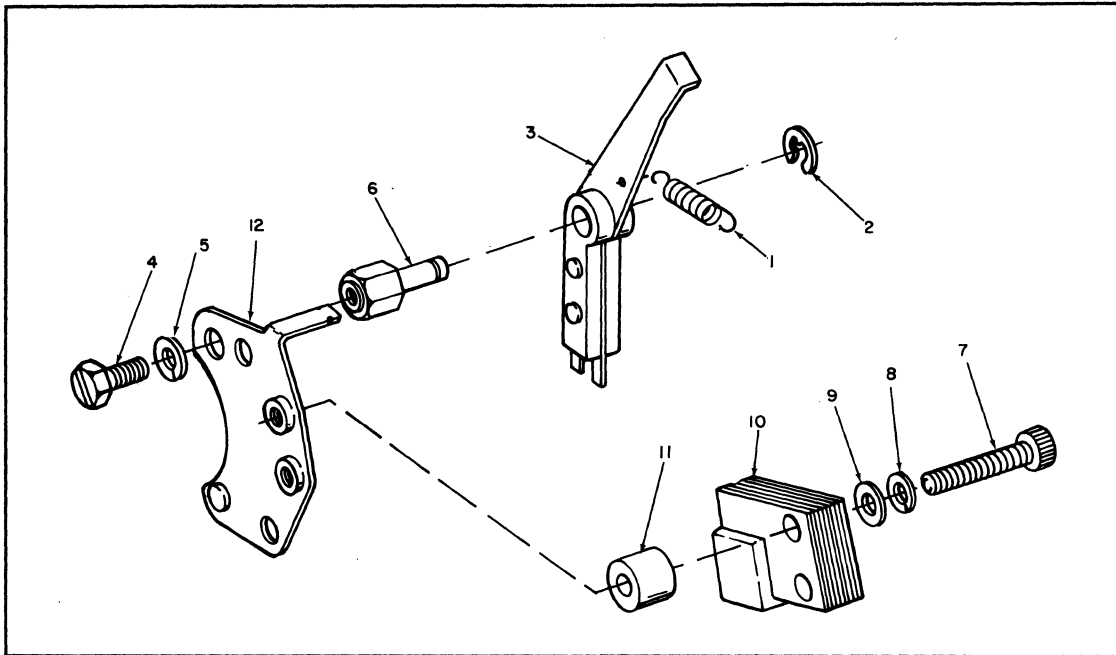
D-22. Magnet and armature clutch release assembly, exploded view.
